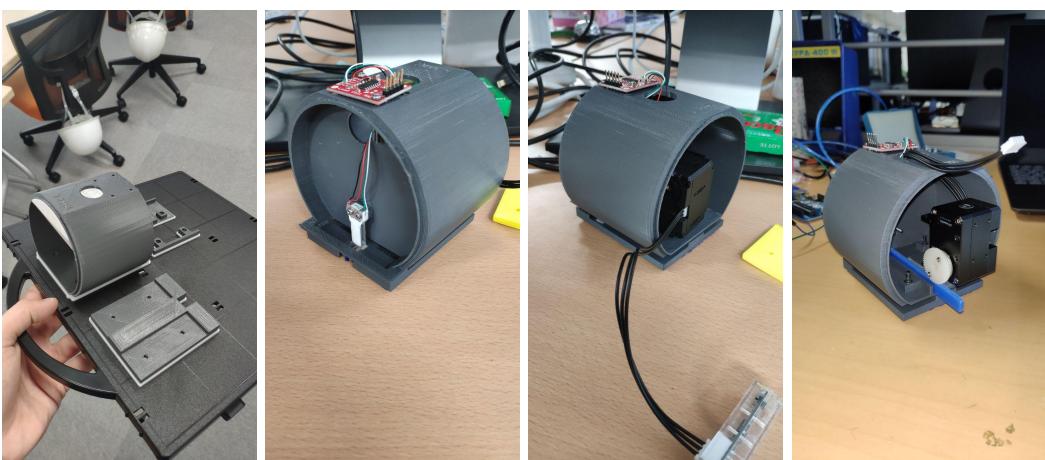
MK4 assembly. From left to right: parts printed, structure of load cell anchoring mechanism, mounting of the motor and final section
